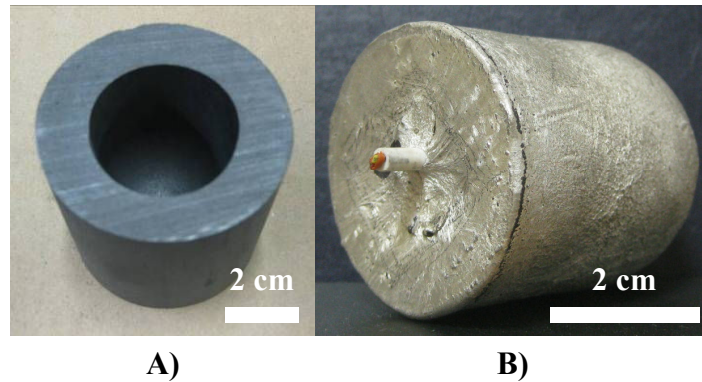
A) Graphite Mould B) Graphite Mould Casting
